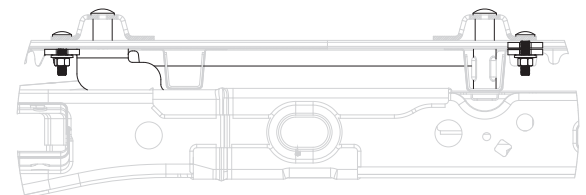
INSIDE FRAME RAIL ACCESS HOLE DETAIL
